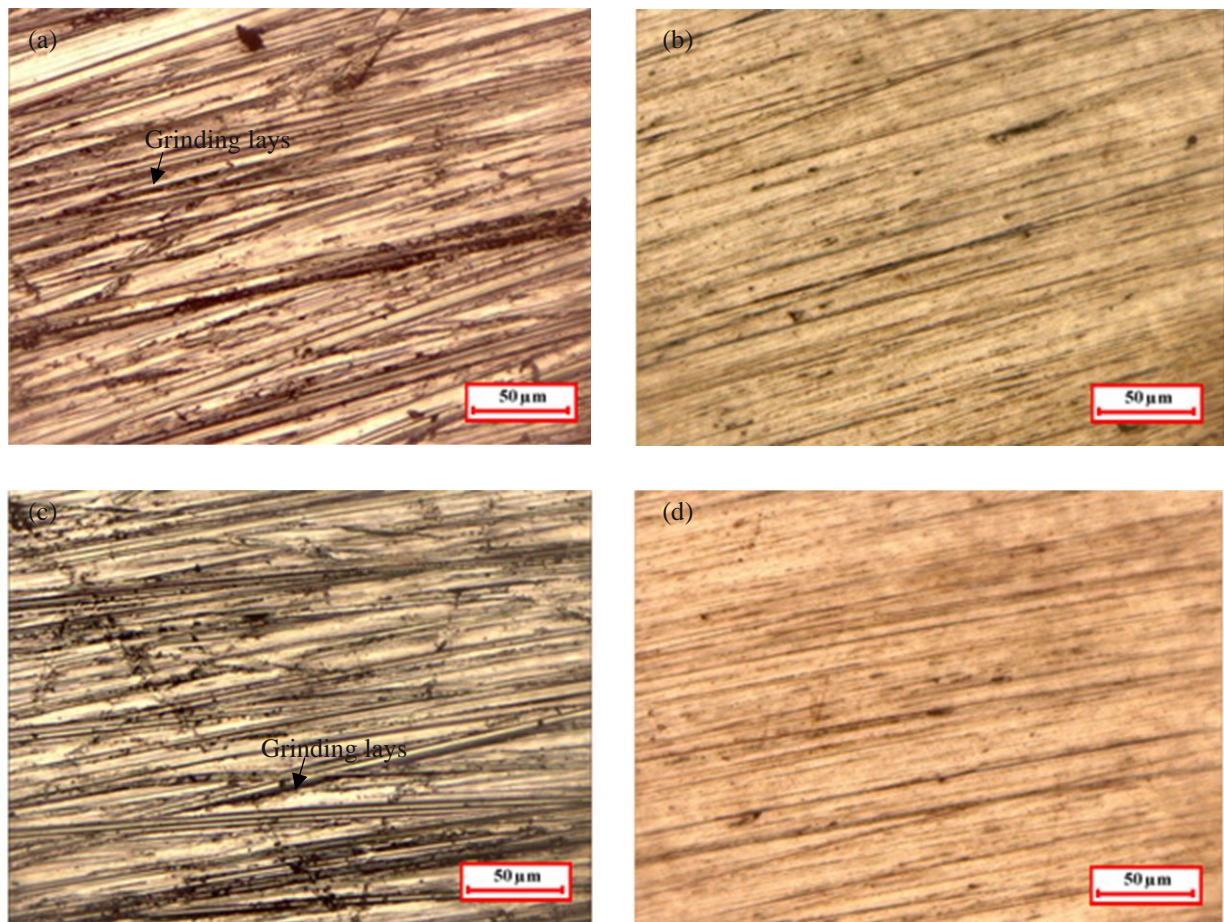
Optical microscope images of the (a) initial, (b) final MR finished tapered longitudinal surface, (c) initial and (d) final MR finished flat end surface of the typical H13 mould cavity for the light cover.
